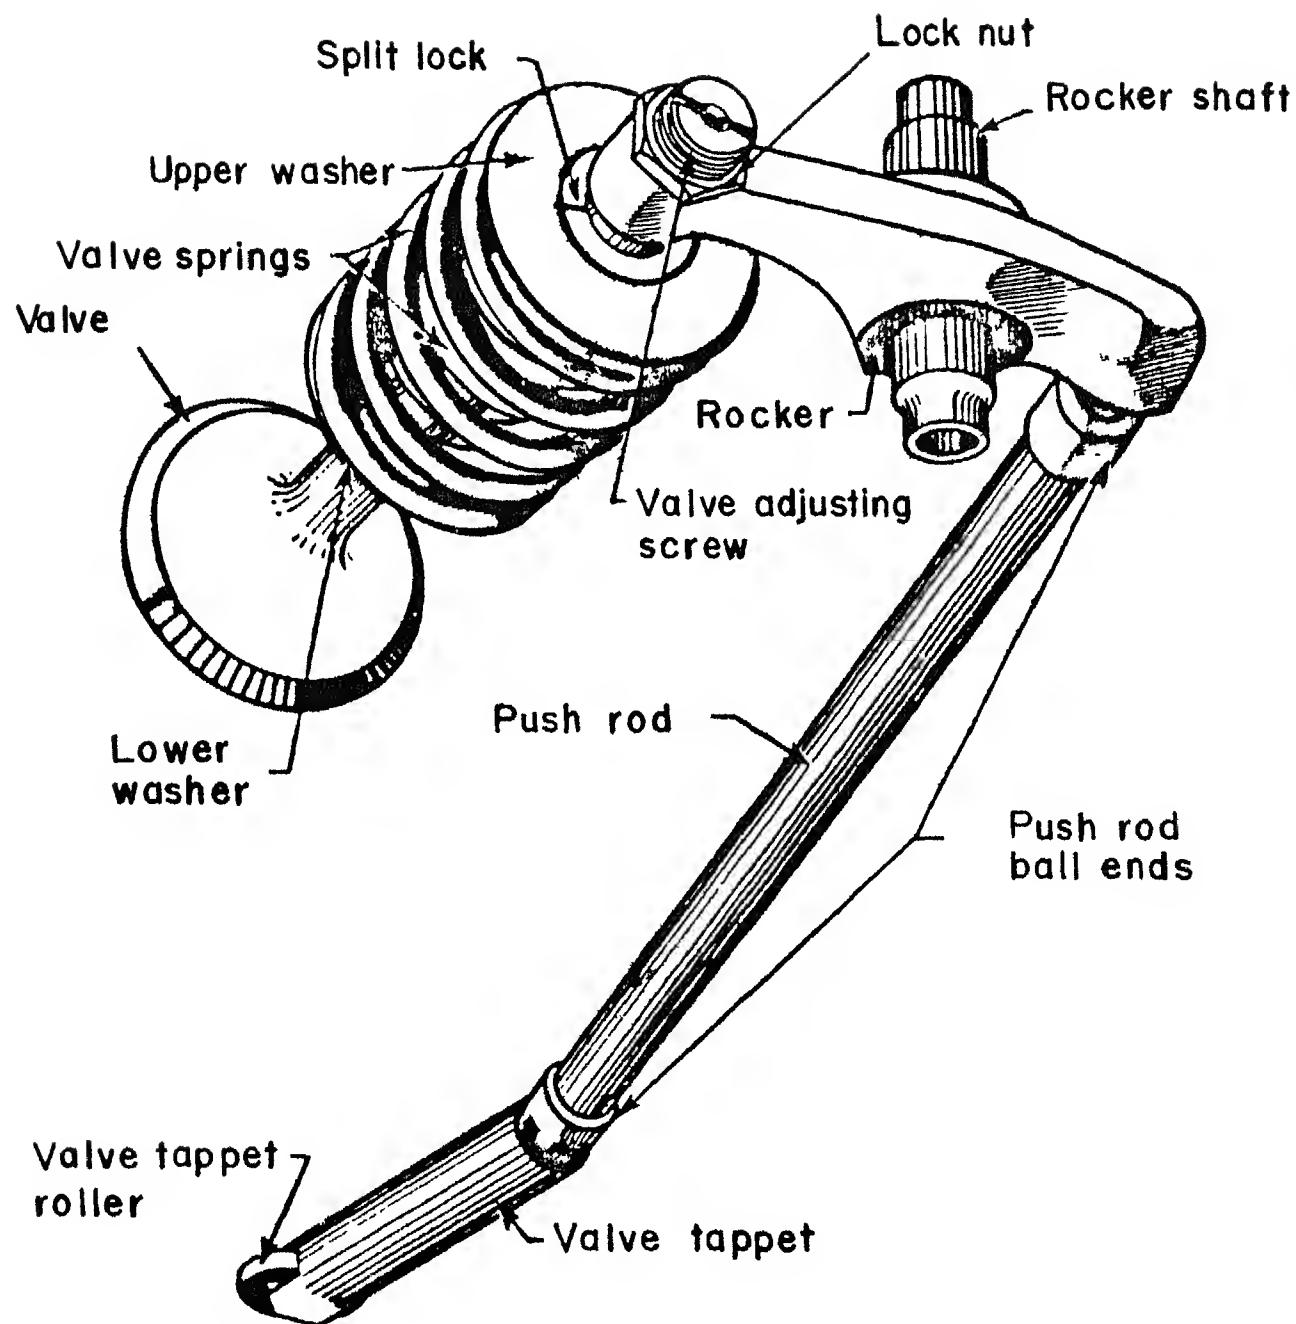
Overhead-valve, rocker arm and push-rod assembly.
